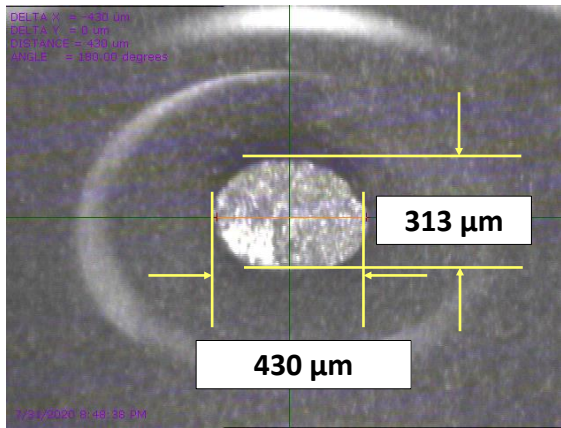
The inkjet-printed via holes with different dimensions using BCB ink.
